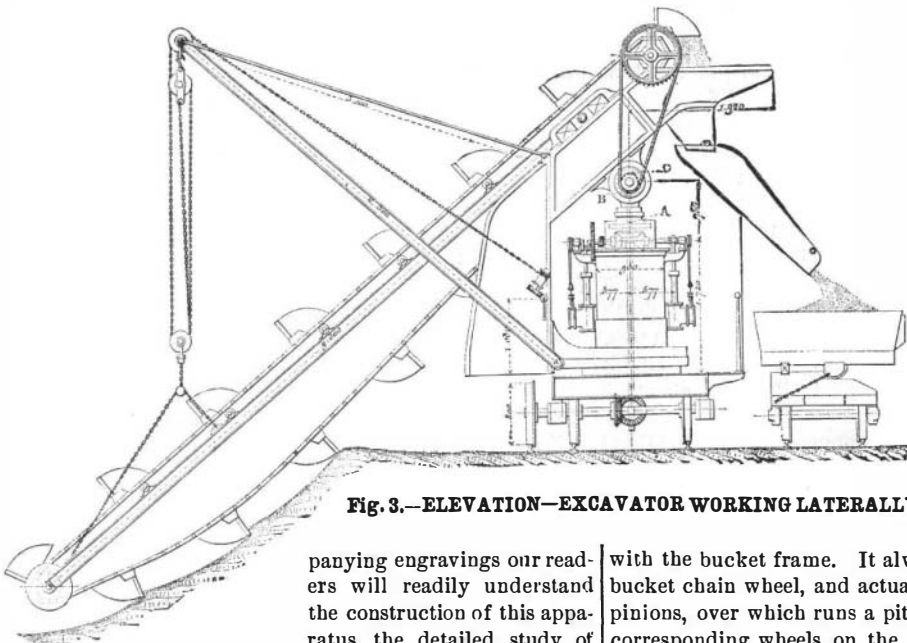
ELEVATION.—EXCAVATOR WORKING Laterally.
